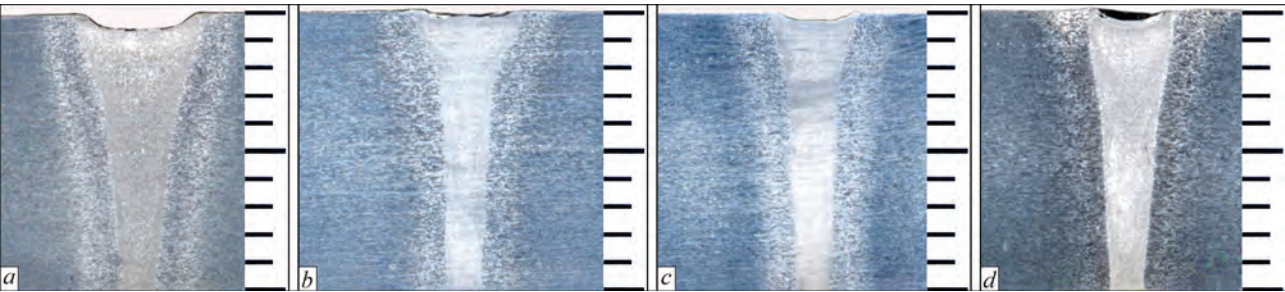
Cross-sections of welds at EBW of 2219 alloy at welding speed: *a* — 10; *b* — 15; *c* — 20; *d* — 25 mm/s
